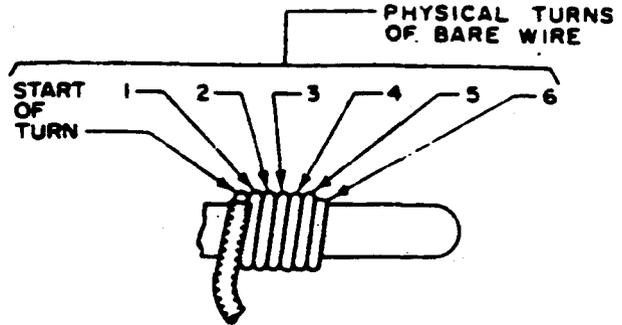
A SOLDERLESS WRAPPED CONNECTION (6 TURNS SHOWN)
